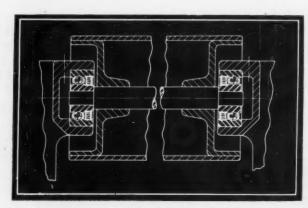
Conveyor roll mountings, especially those exposed to dirt, frequently incorporate protected bearings
